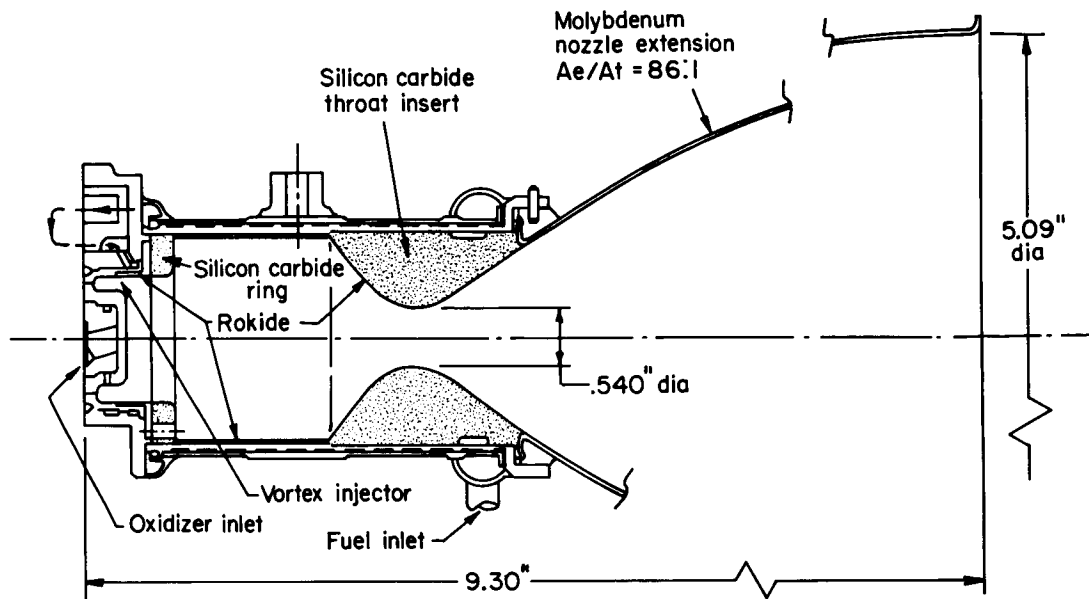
Surveyor vernier engine thrust chamber and injector assembly.
